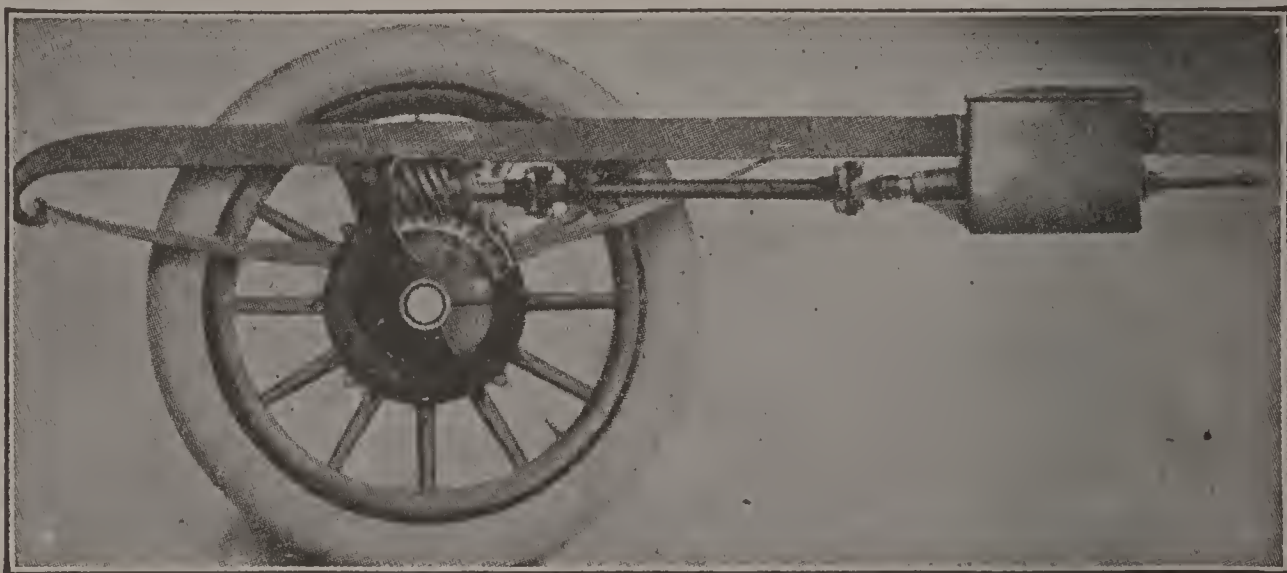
Worm Gear Applied to Rear Axle Drive of Touring Car
